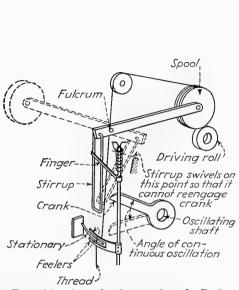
A mechanism used on the Barber-Colman spooler. When the thread breaks, the feelers are released and the spiral spring causes the spindle with finger to rotate. The latter throws the stirrup into the path of the oscillating crank, which on its downward stroke throws the spool into the position shown dotted, the stirrup then being thrown out of the path of the oscillating crank.
